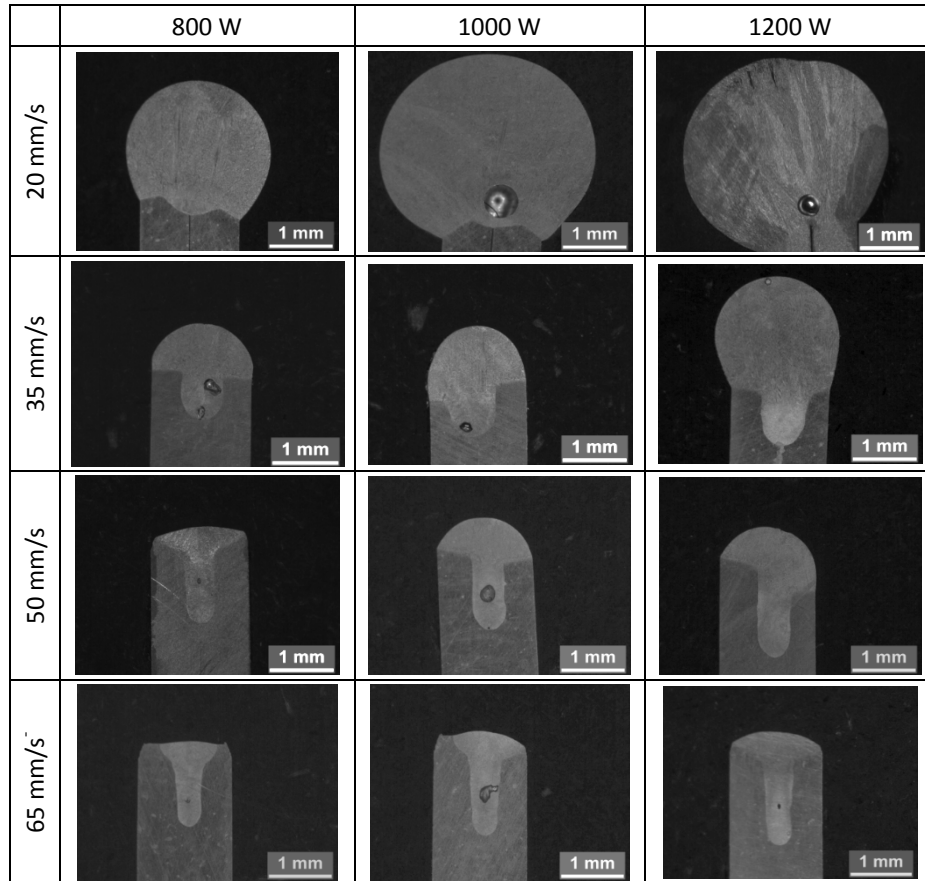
Macrographs for the 12 welding conditions
